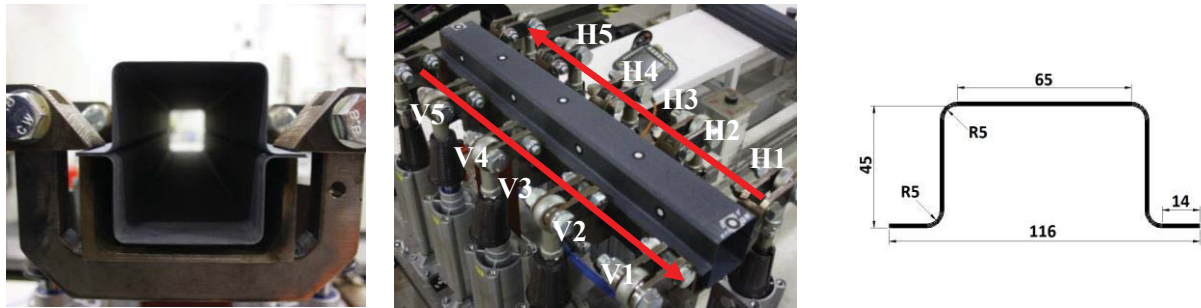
Left and middle picture shows the fixture used during welding trials. In the middle picture the welding direction on each flange can be seen including each clamping H1-H5 and V1-V5. In the right picture the dimensions of the 700 mm long beam are shown in detail (shown in mm).
